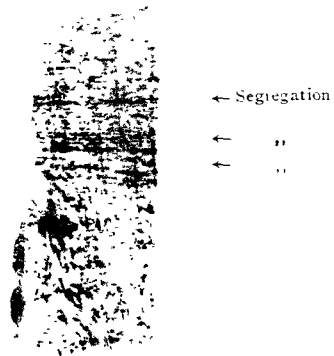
Same as Fig. 10, but a neighbouring cut section.
